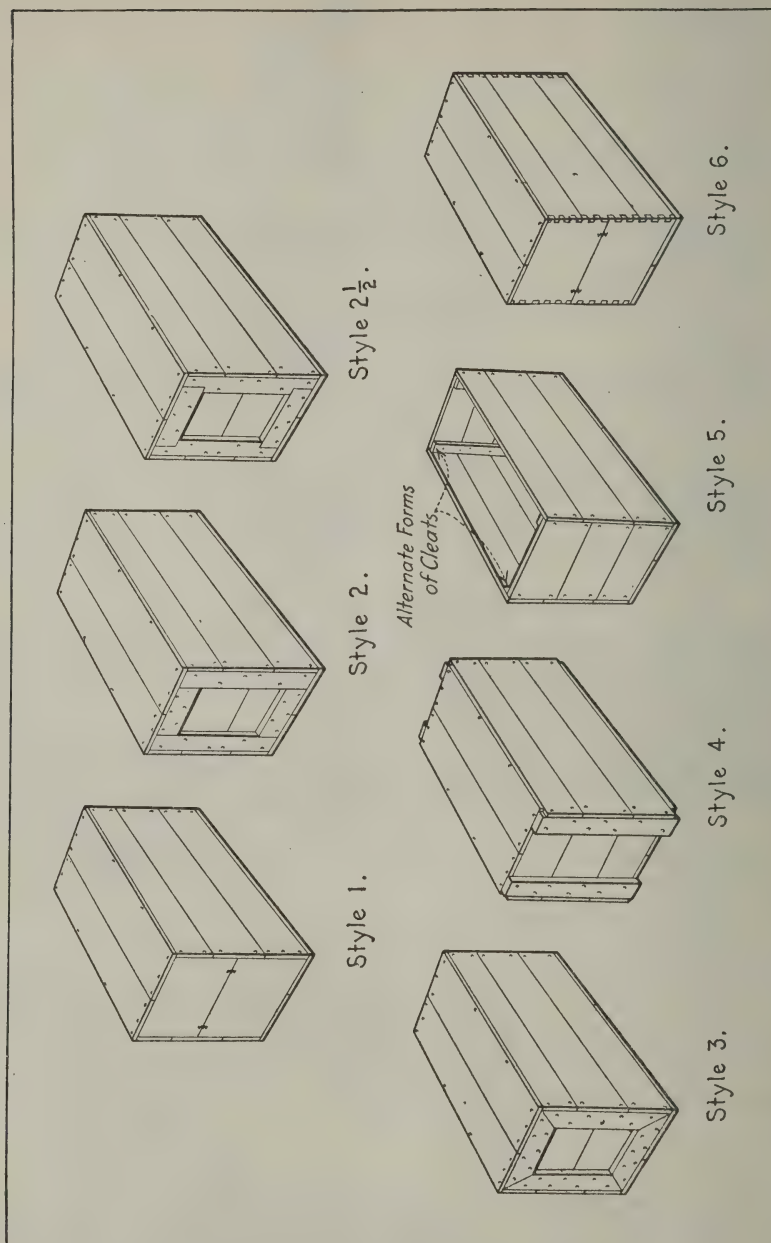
Styles of Wooden Boxes, Nailed and Lock-Corner Construction.
